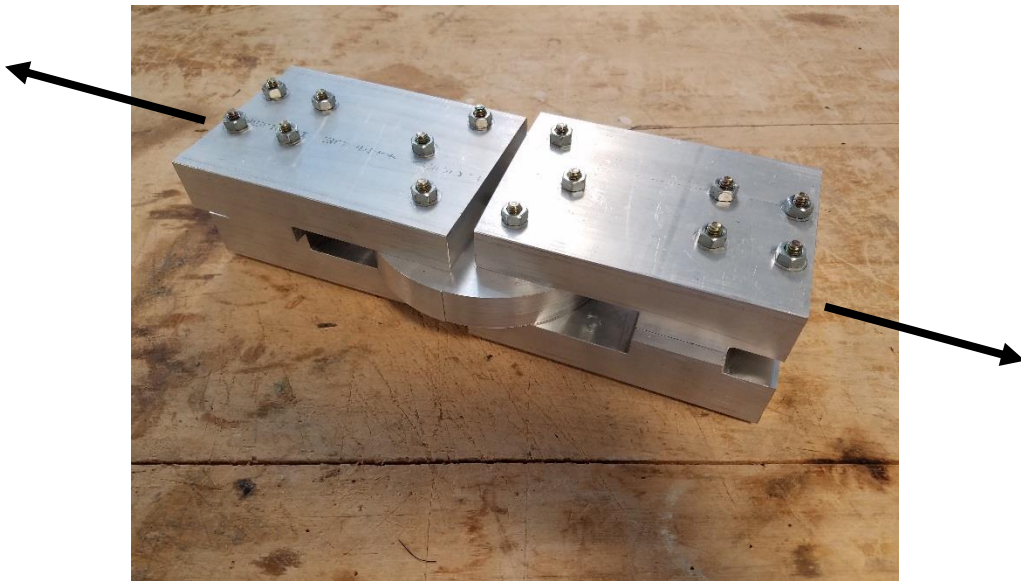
Testing fixture fully assembled with directional arrows to show how the Instron will pull the test parts apart
